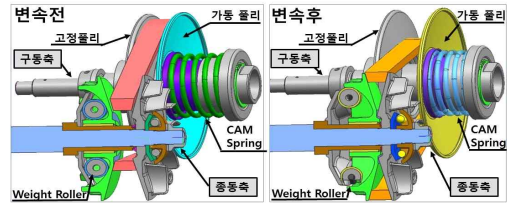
Structure of belt-pulley CVT type gearbox for small wind turbine
